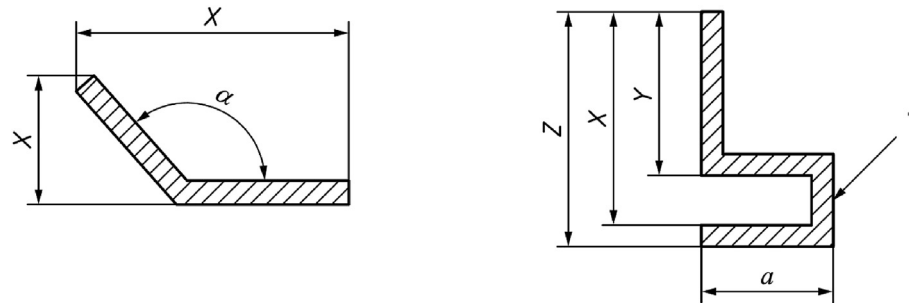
Cross-sectional dimensions of angled extruded profiles.
